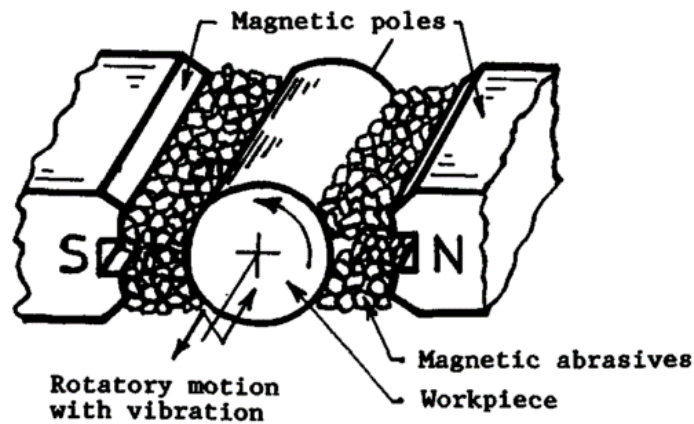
Cylindrical Magnetic Abrasive Finishing Setup [3].
